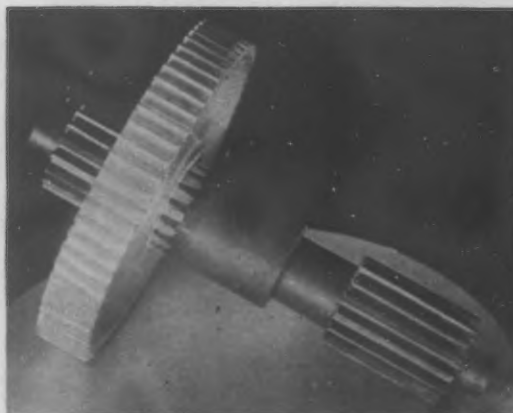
Idler Gear for Speed Reducer Used on an Electric Hoist. Note the 4-in. (diameter) gear which has been cast around the 1 1/8-in. axle
